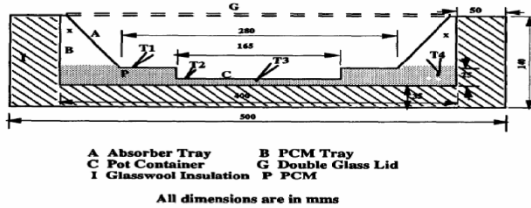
Box type solar cooker with PCM storage at bottom
